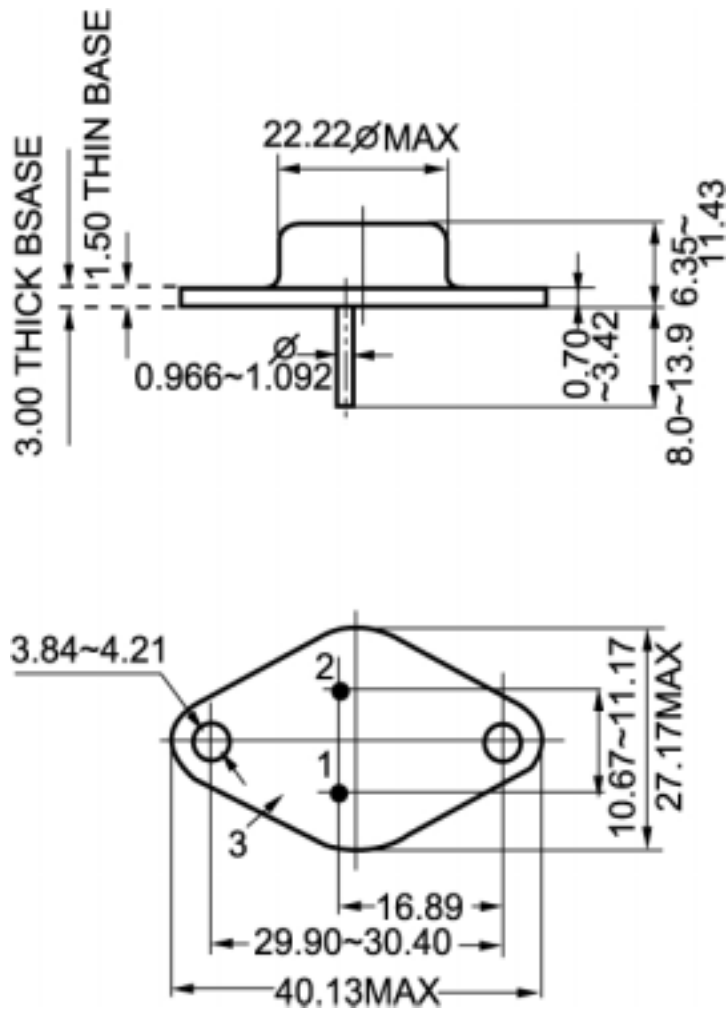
outline dimensions (unindicated tolerance:  $\pm 0.10$ mm)
